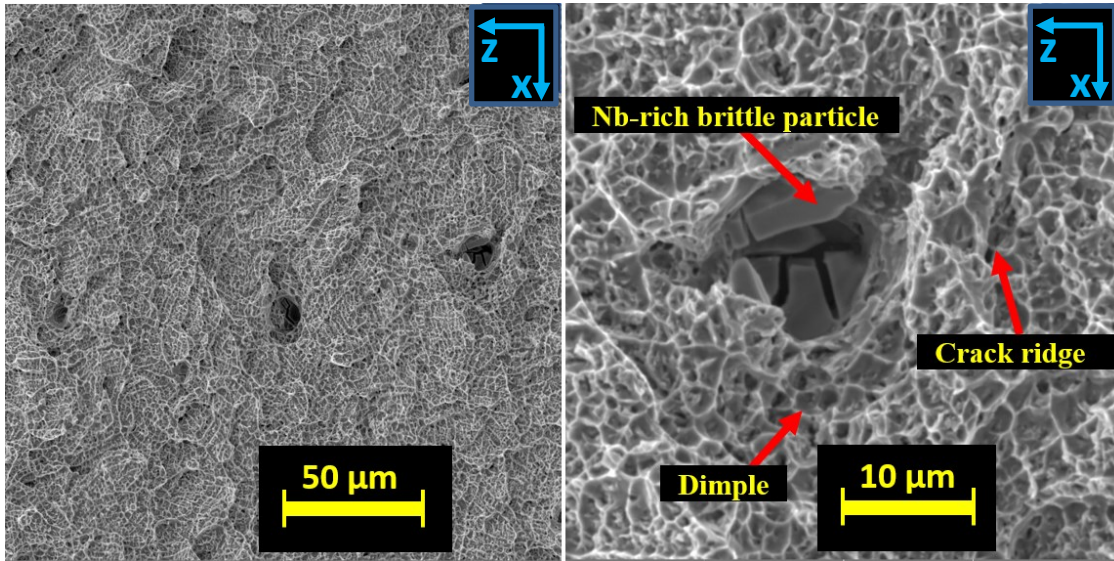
SEM fractography of the sample A21 (272.6 J/mm) that broke through the weld zone
